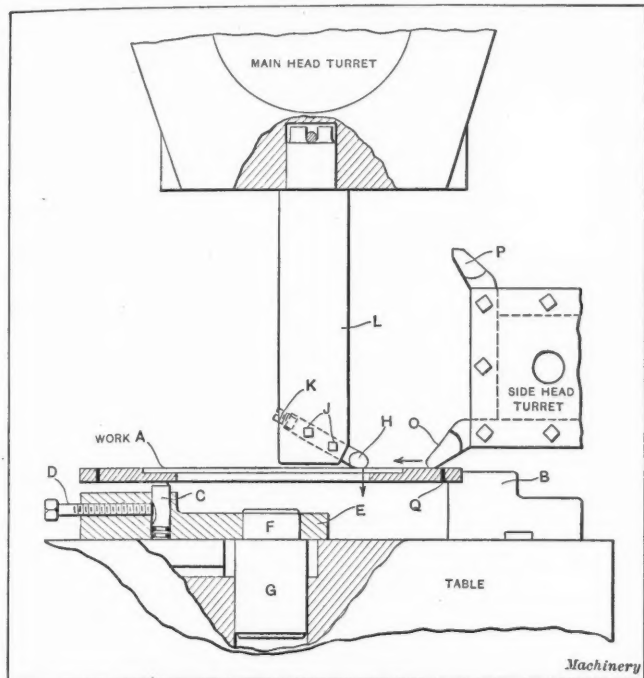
Machining Steel Sprocket for Automobile Trucks
